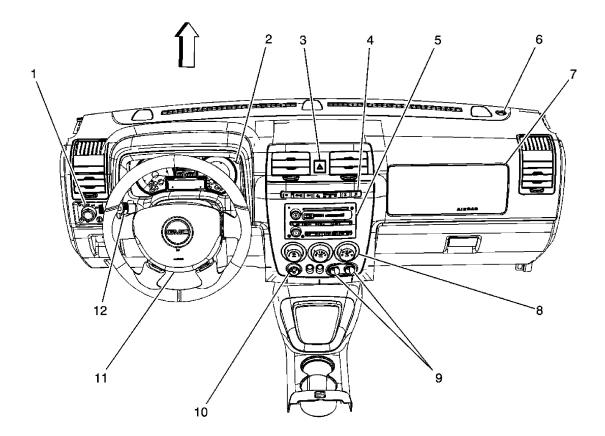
Identifying I/P Harness Components Courtesy of GENERAL MOTORS CORP.
